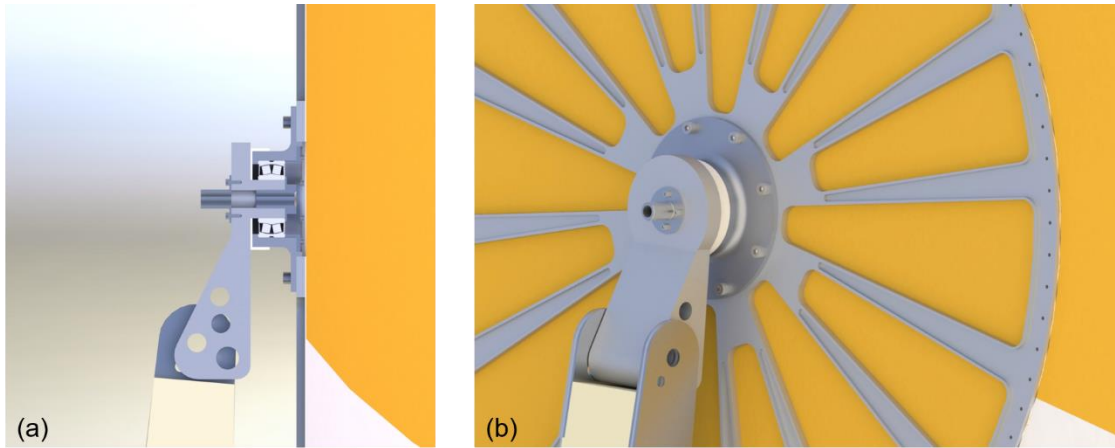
Section view (a) and a close-up view (b) of the left side assembly
